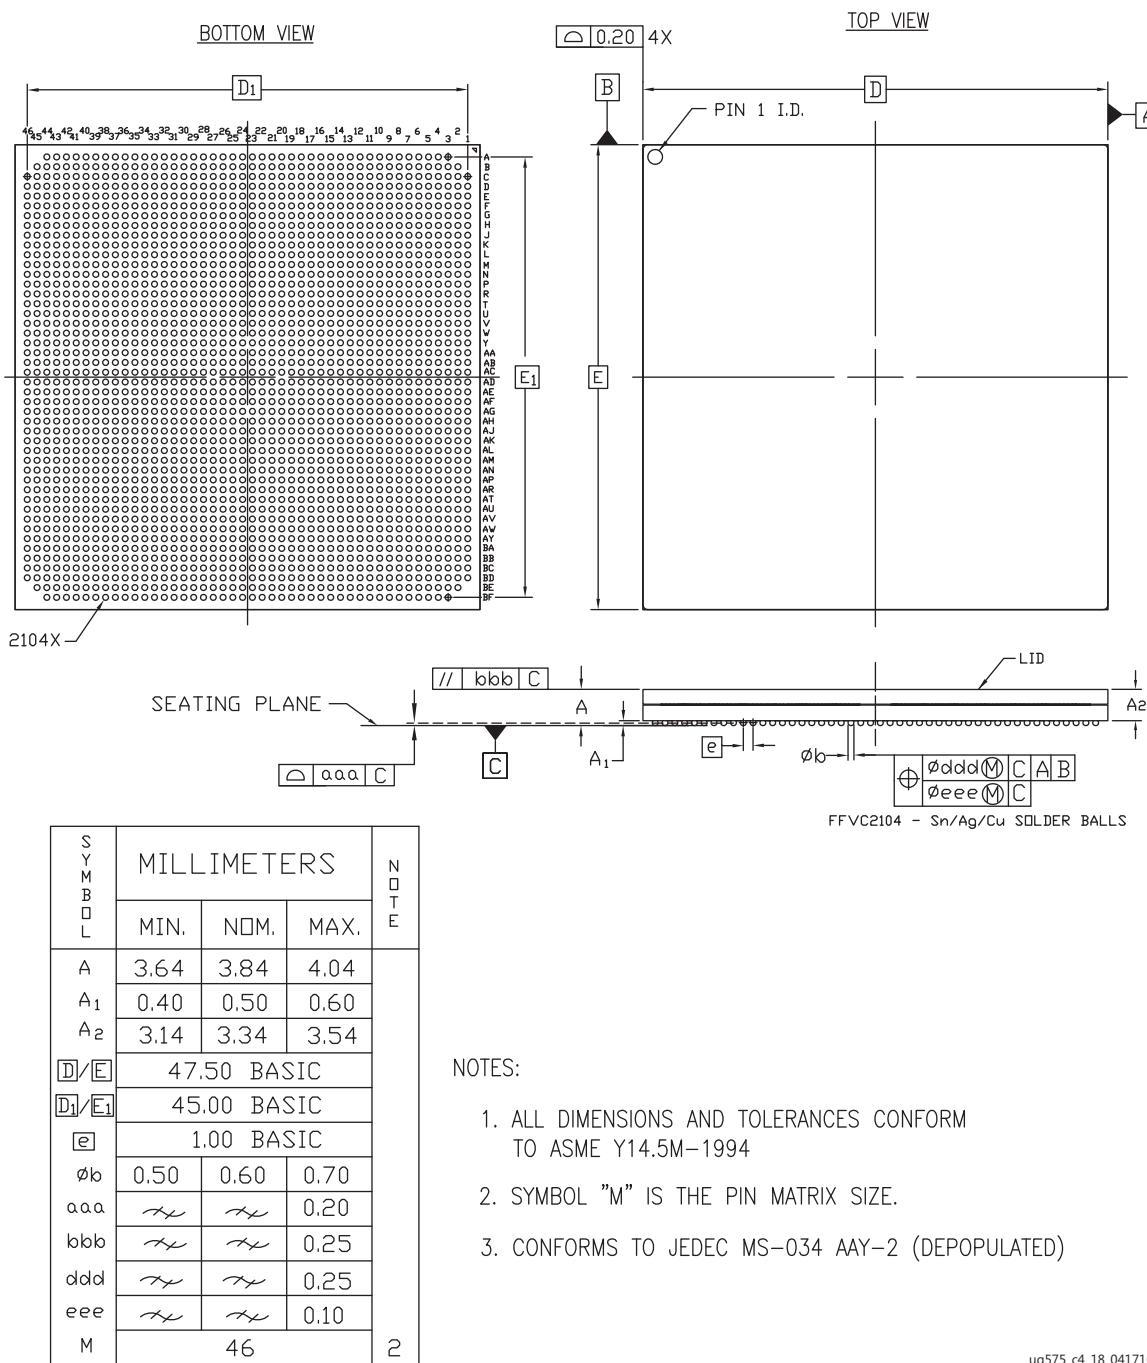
Package Dimensions for FFVC2104 (XCVU095)
